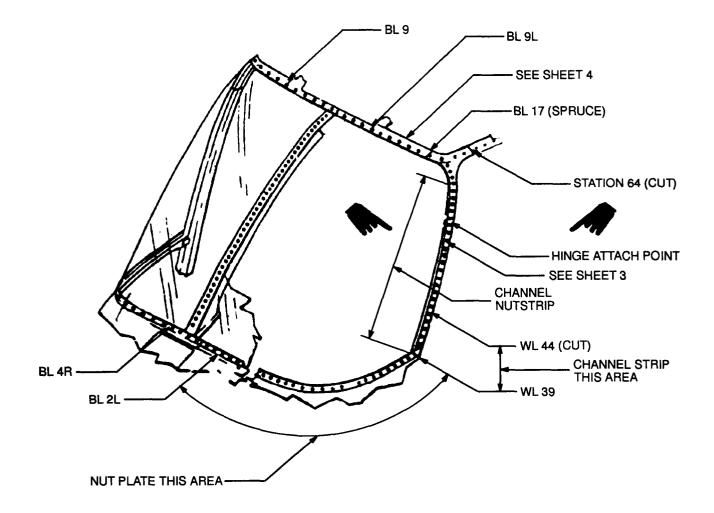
Door Frame/Windshield Frame Assembly Repair (Sheet 2).
